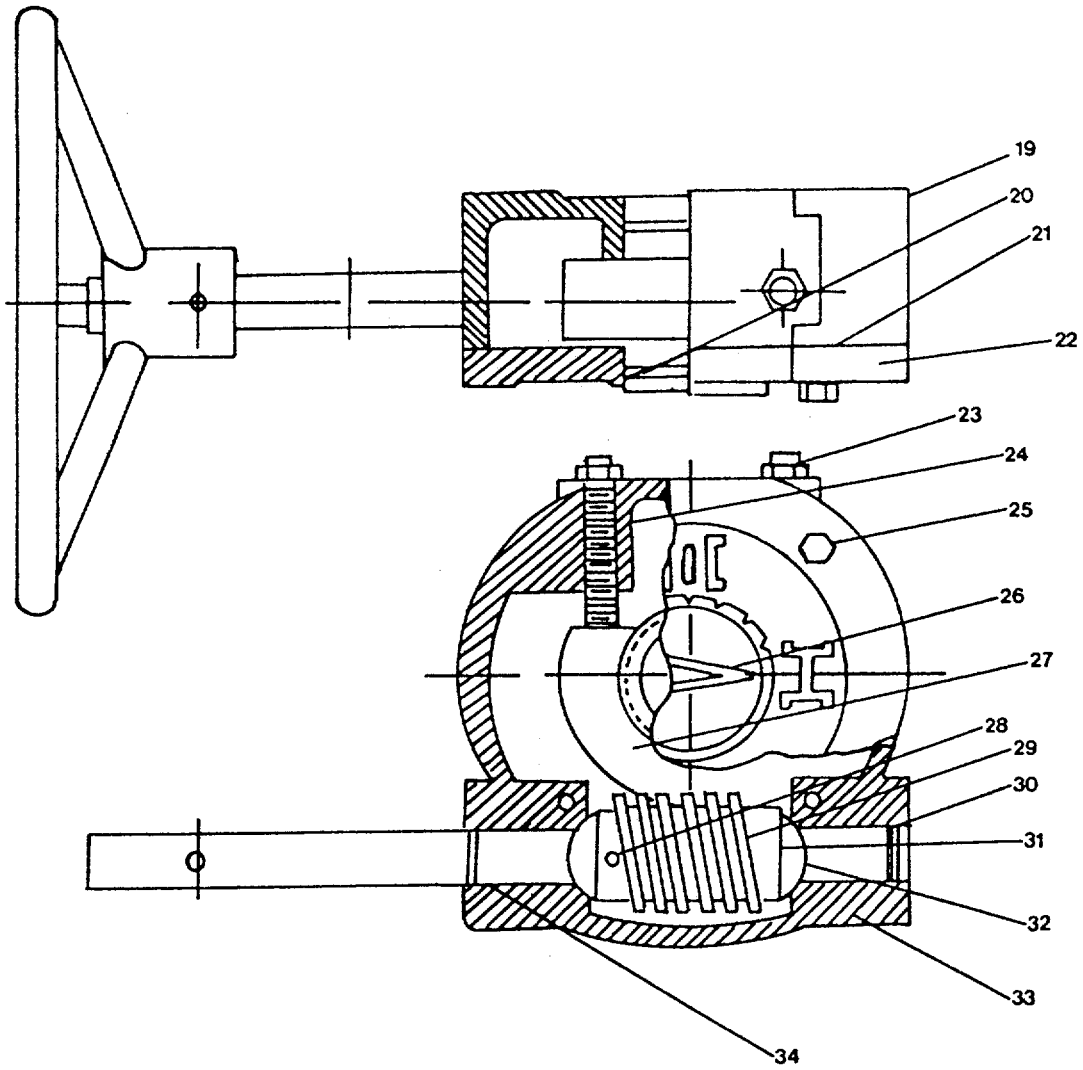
VALVE, BUTTERFLY, GEAR OPERATED 12-ILA-222-TTG-30D
